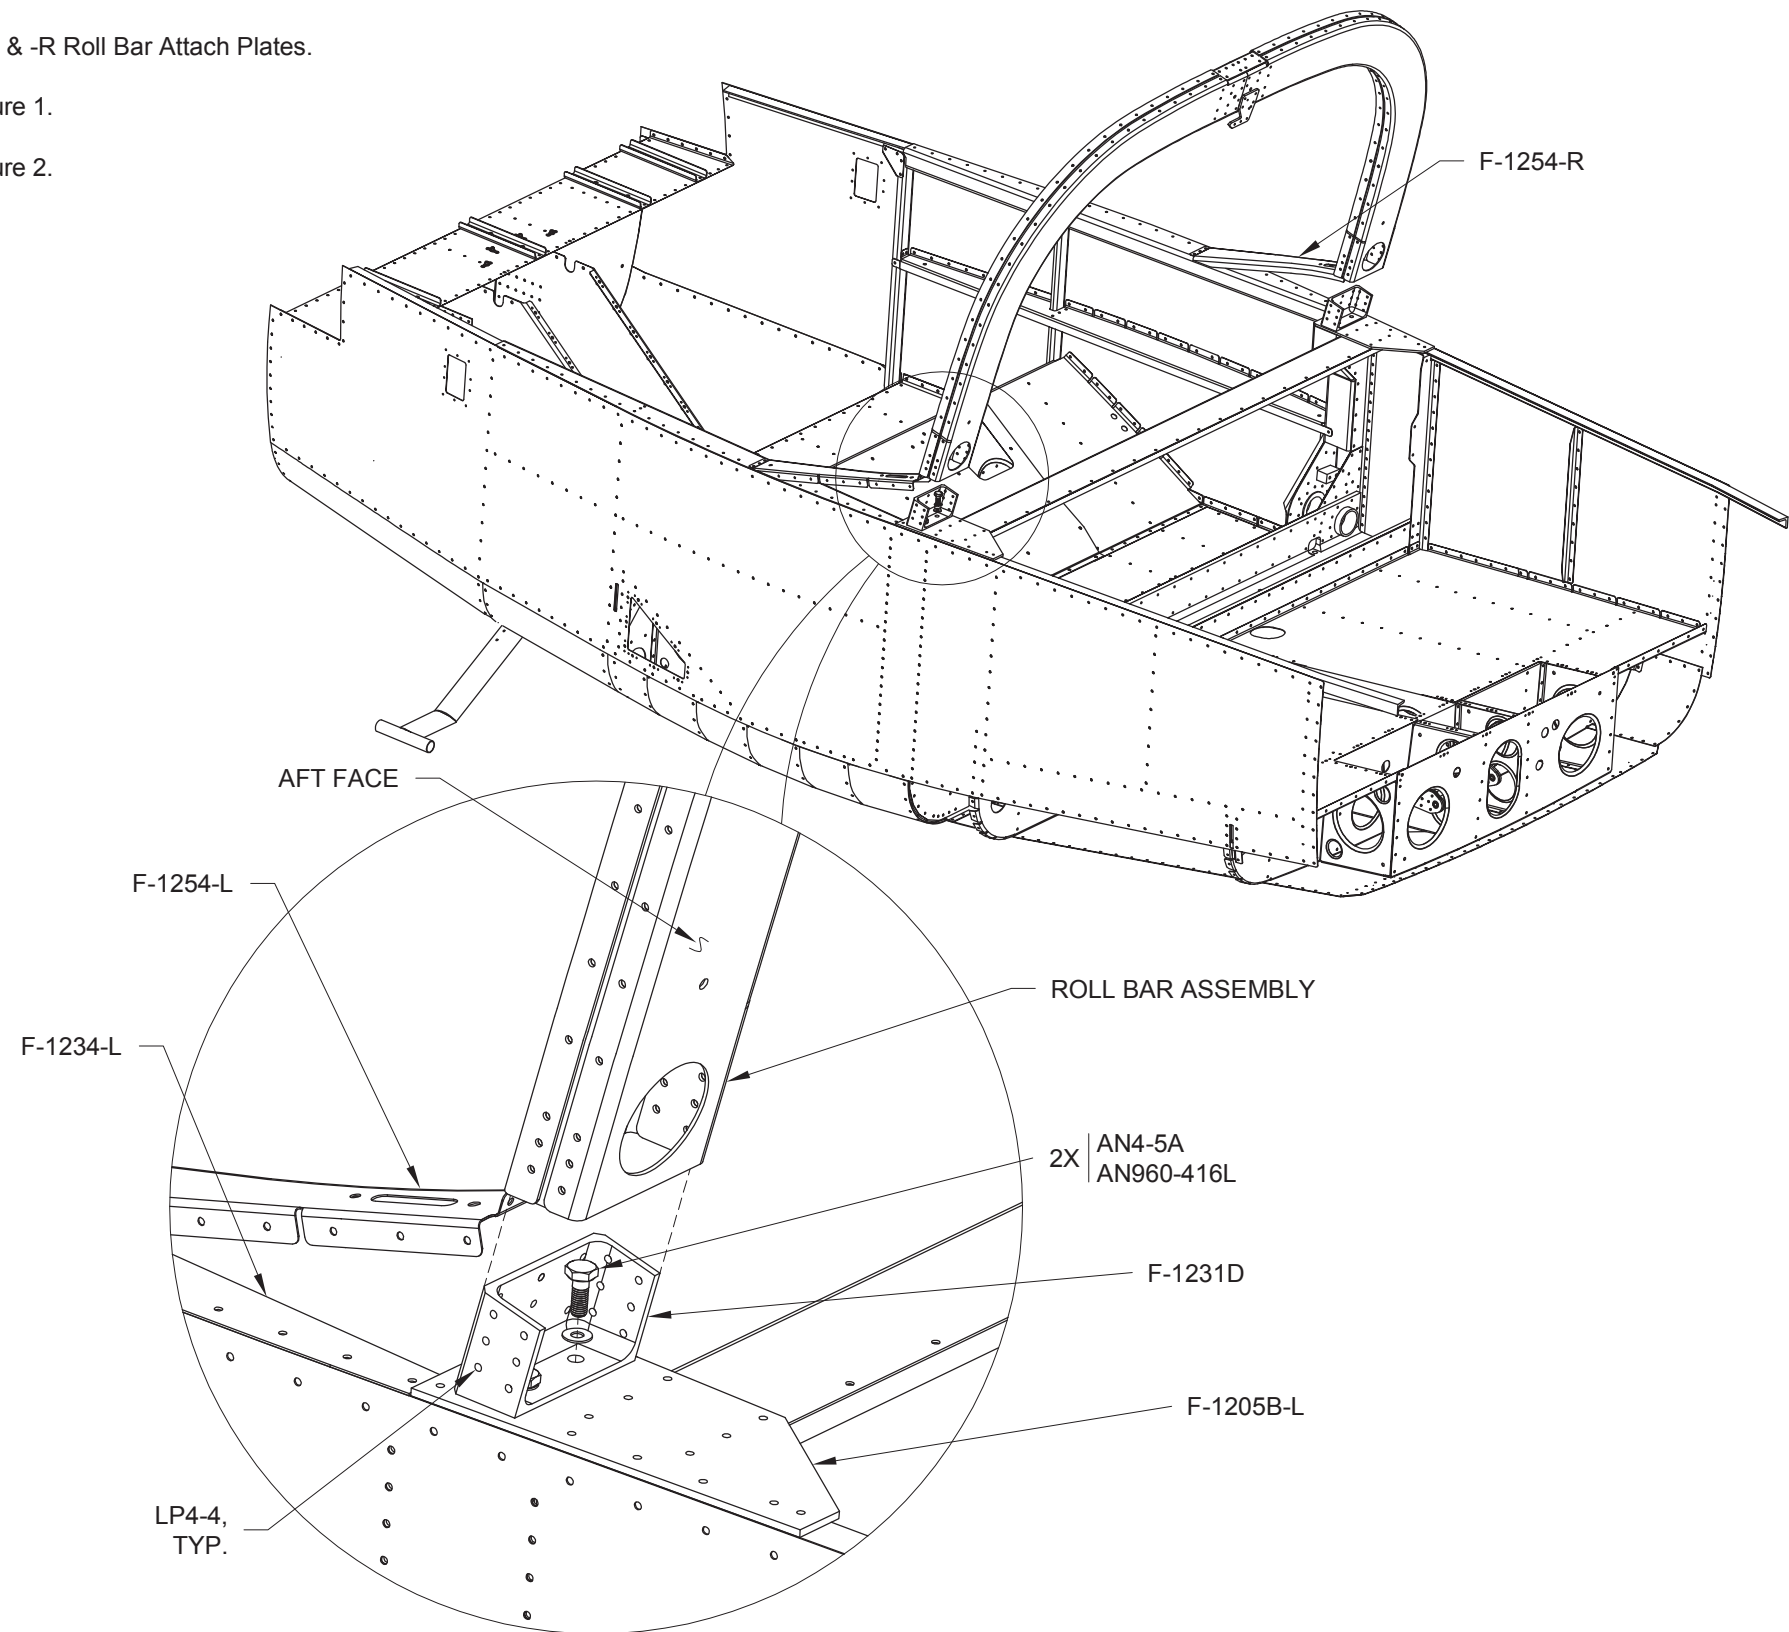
INSTALLING THE ROLL BAR ASSEMBLY
